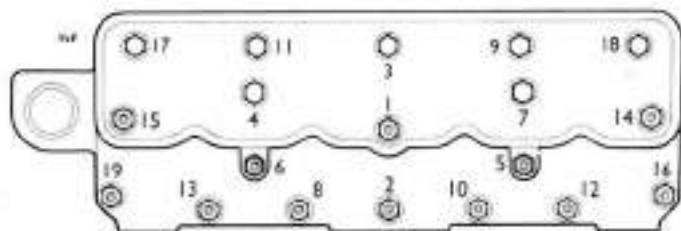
/16. CYLINDER HEAD TIGHTENING SEQUENCE
